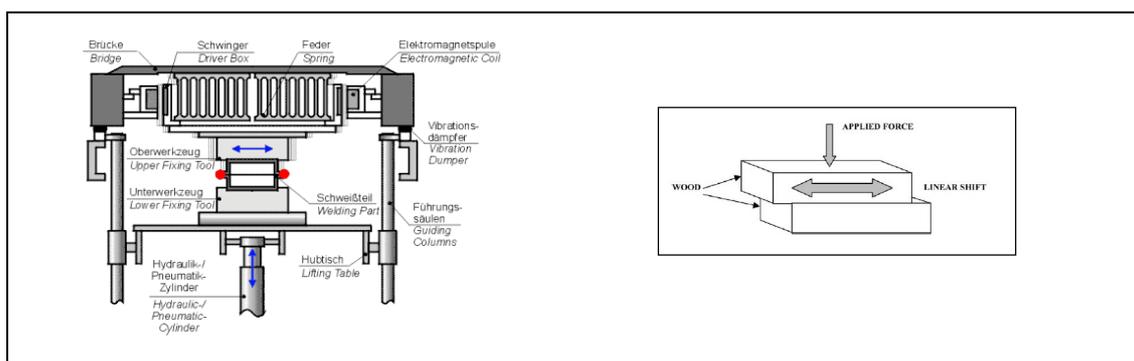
Linear Vibration Welding machine (LVWM) and welding process.
